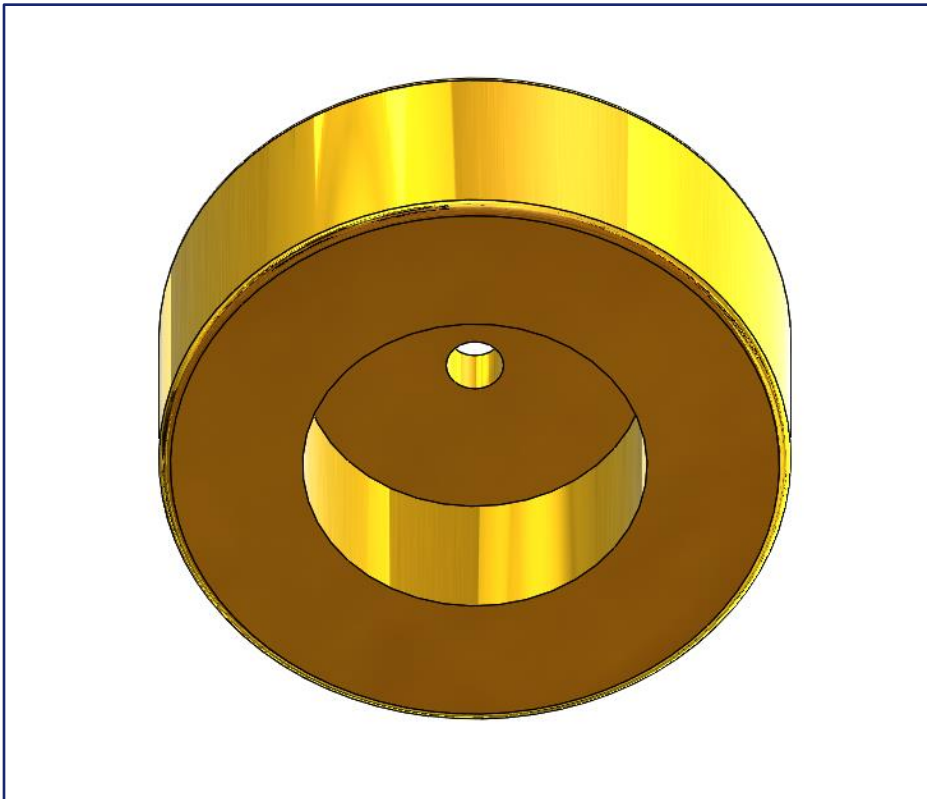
GYROSCOPE IN SOLIDWORKS VIEW OF BOTTOM
